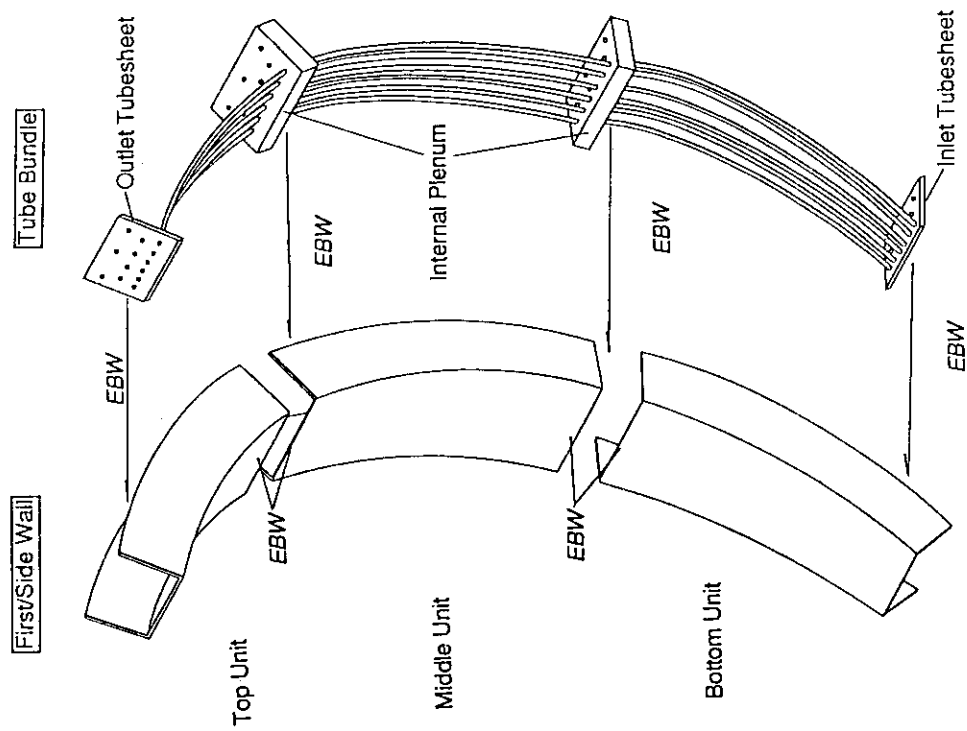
Assembling of blanket vessel and tube bundle
